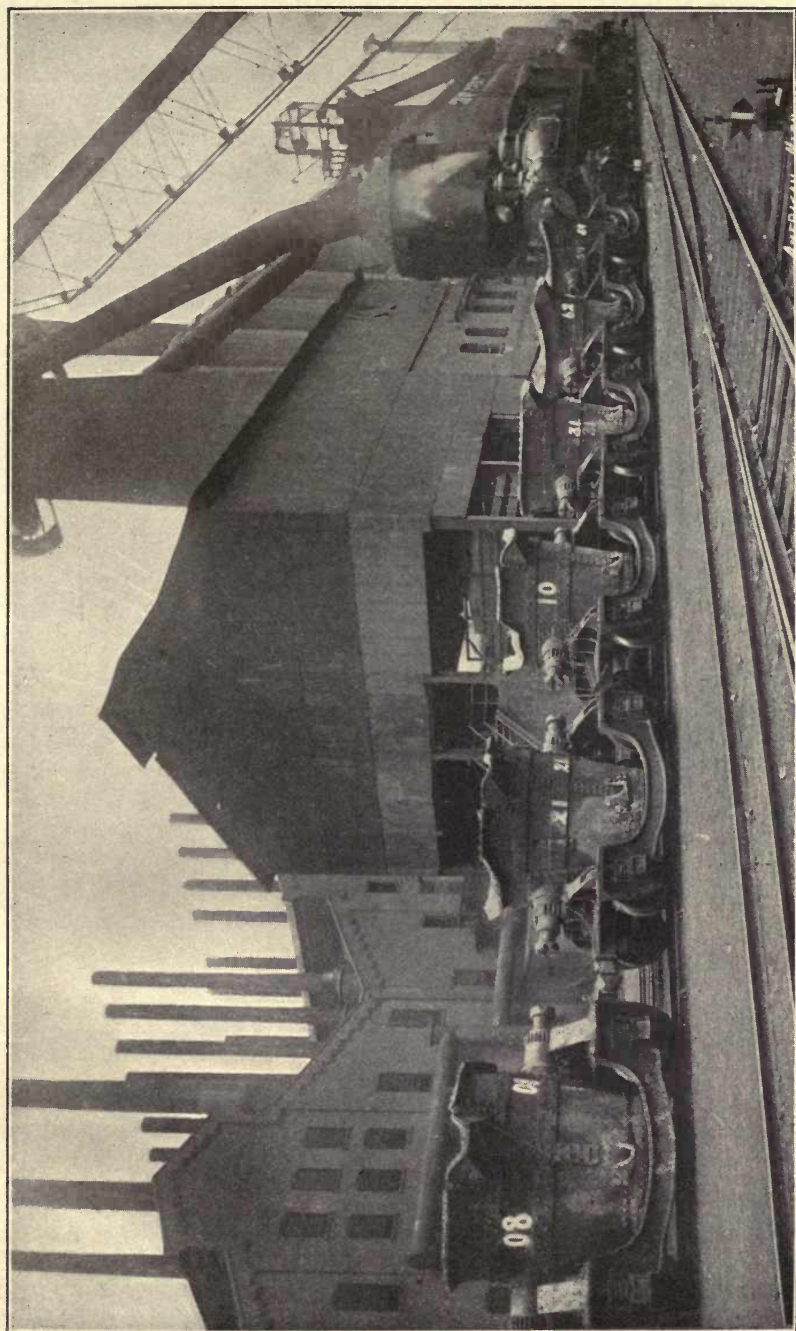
"Hot metal" ladle cars carrying molten cast iron to steel converters.
